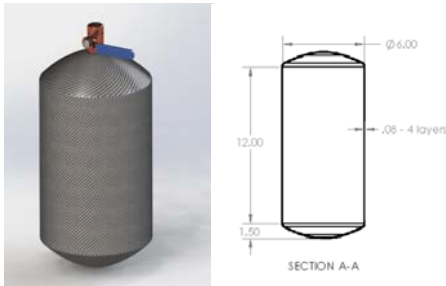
Pressure Vessel Solidworks design and drawing schematic
